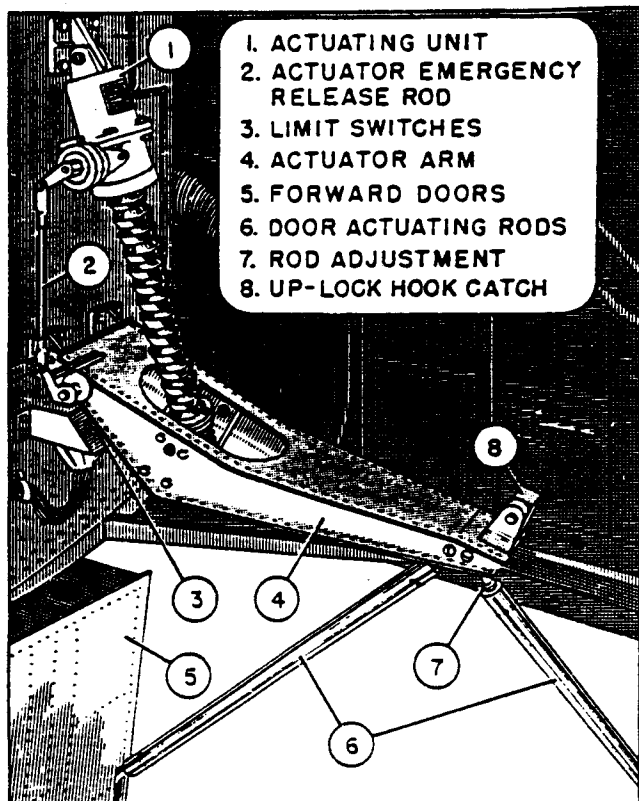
Main Landing Gear Forward Door Operating Mechanism
